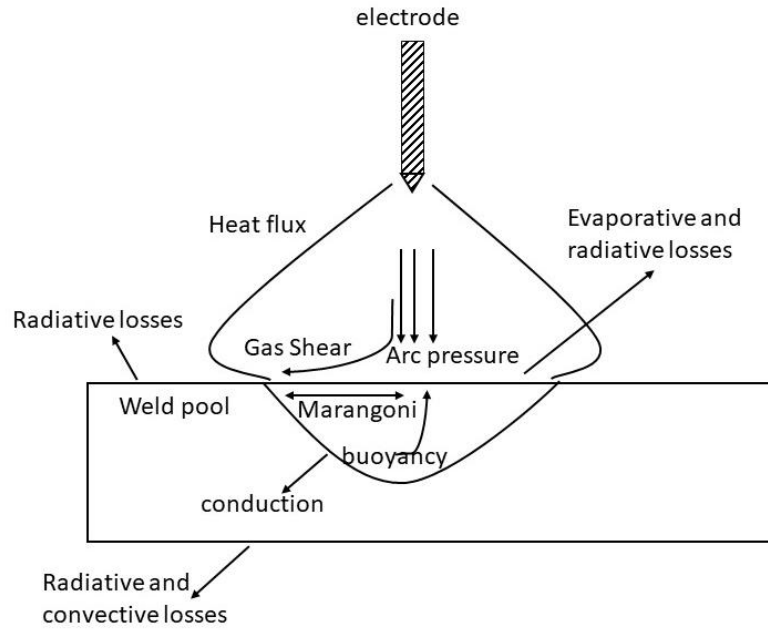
Schematic representation of a gas tungsten welding arc with the weld pool.
